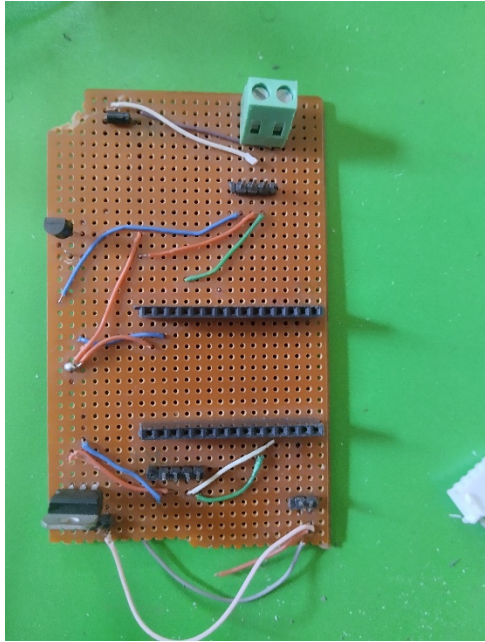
MOUNTING OF COMPONENTS ON THE VERO BOARD AND CONNECTING WITH JUMPER WIRES.
